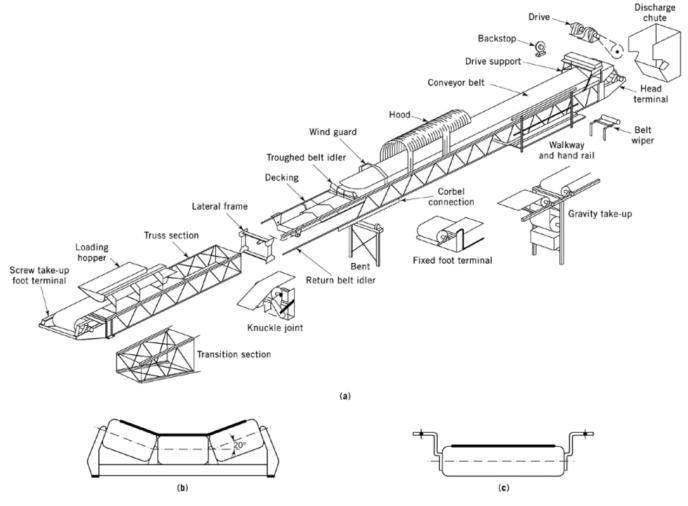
(a) Belt conveyor and support assembly, (b) 20° troughing idler, and (c) return idler.
